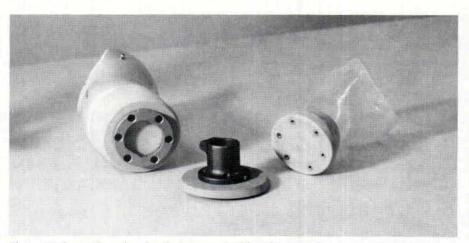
Syntactic end seal technique used with polyester below knee socket, Thermovac below knee socket, and with USMC below knee module clamping component.
